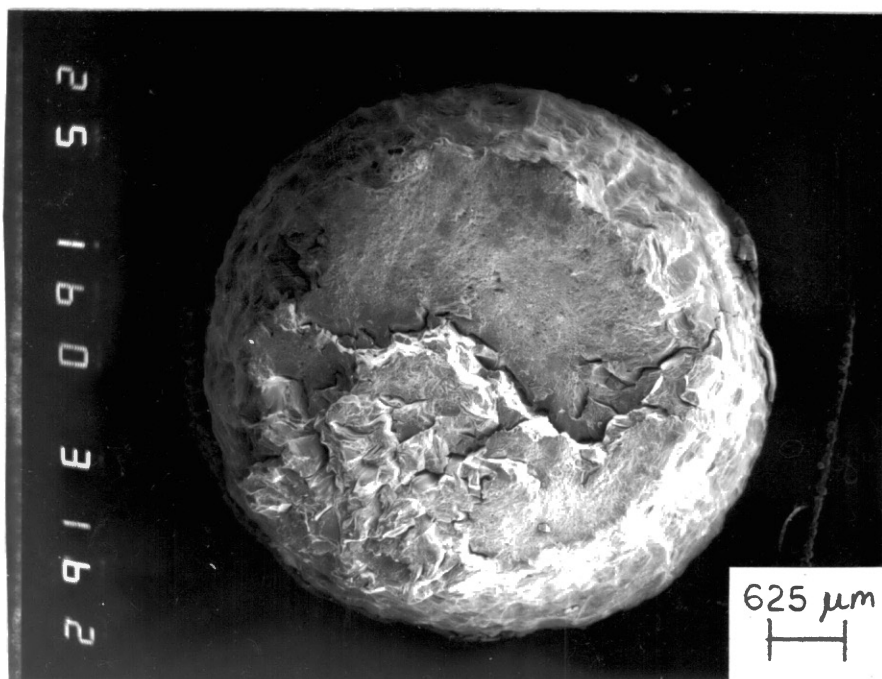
Fracture Surface of Monel 400 Broken in Mercury at $1.6 \times 10^{-4} \text{ s}^{-1}$. No tearing is visible; the entire fracture looks to be intergranular.
